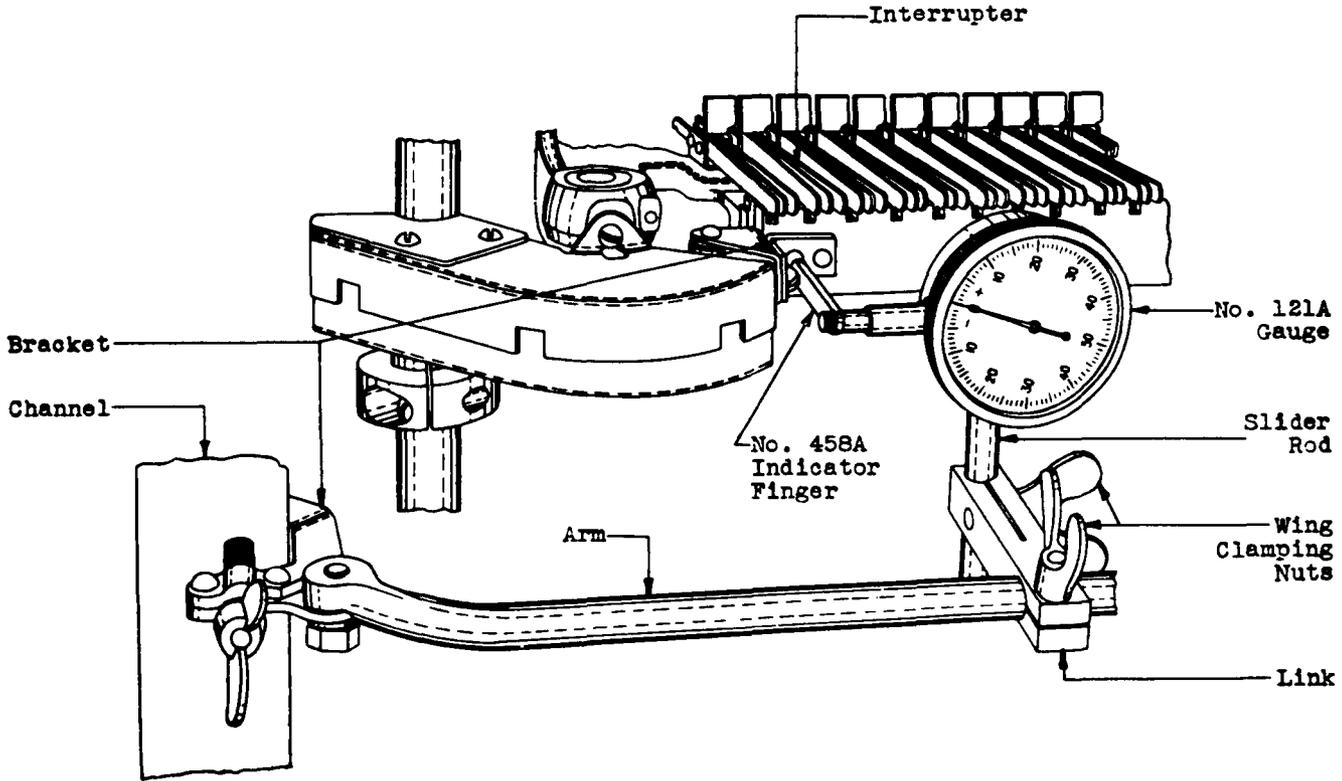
Mounting Arrangement of No. 473A Gauge Positioning Bracket for Checking Contact Separation
